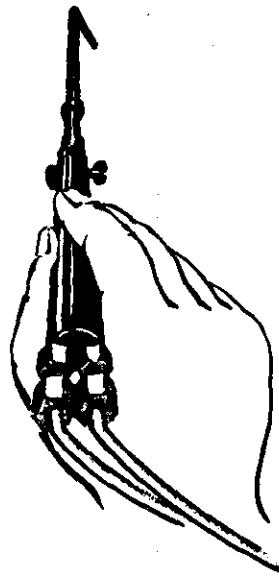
Holding the acetylene torch to weld light-gage metals.
